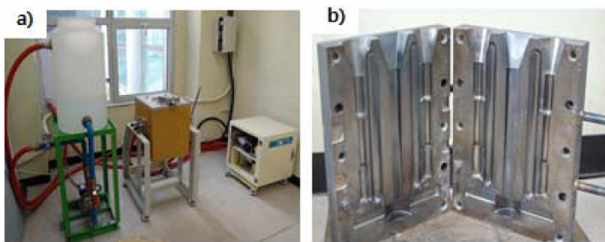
Experimental facilities; (a) Induction Heating System, (b) The mold of specimens.
